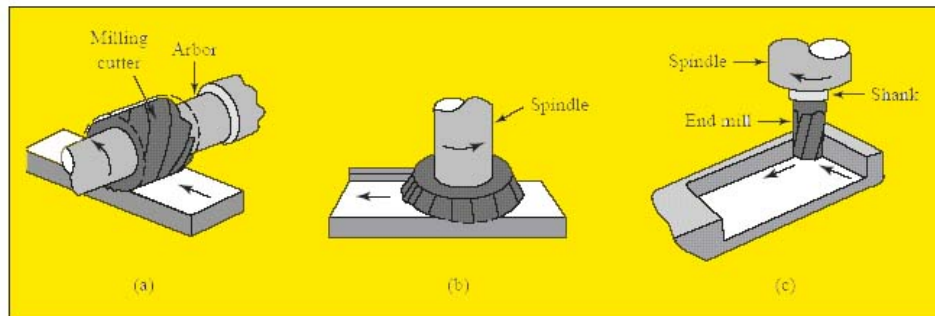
The three basic milling operations: (a) milling, (b) face milling, (c) end milling
